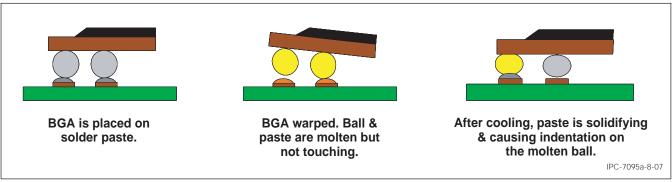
Deformed Solder Joint Due to BGA Warping
